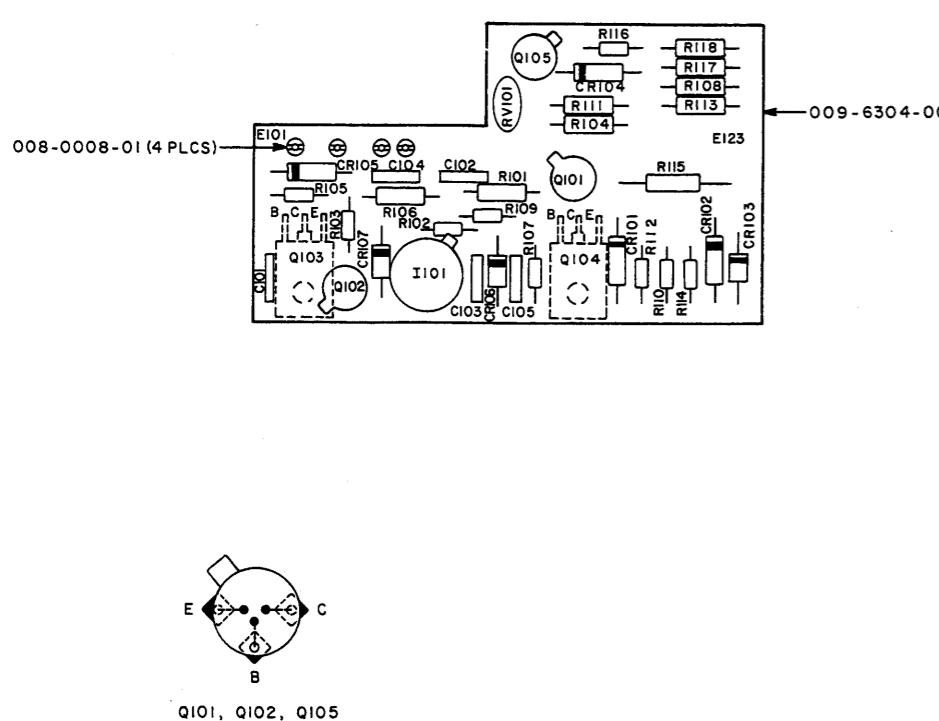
KS 178 PRIMARY SERVO P.C. BOARD ASSEMBLY
